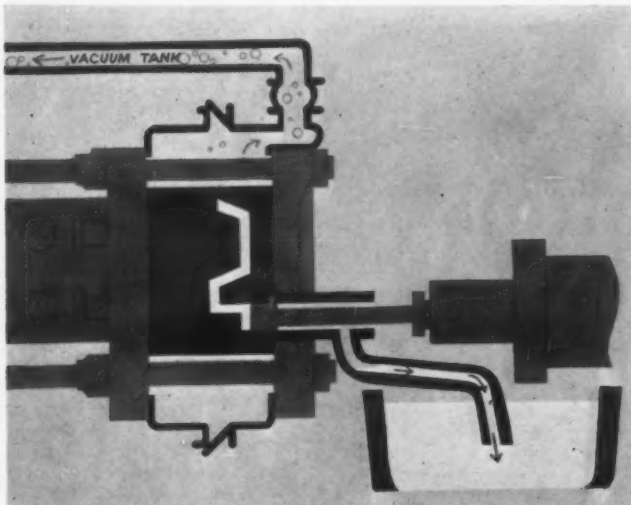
After a predetermined amount of metal is pulled into chamber, machine closes.
